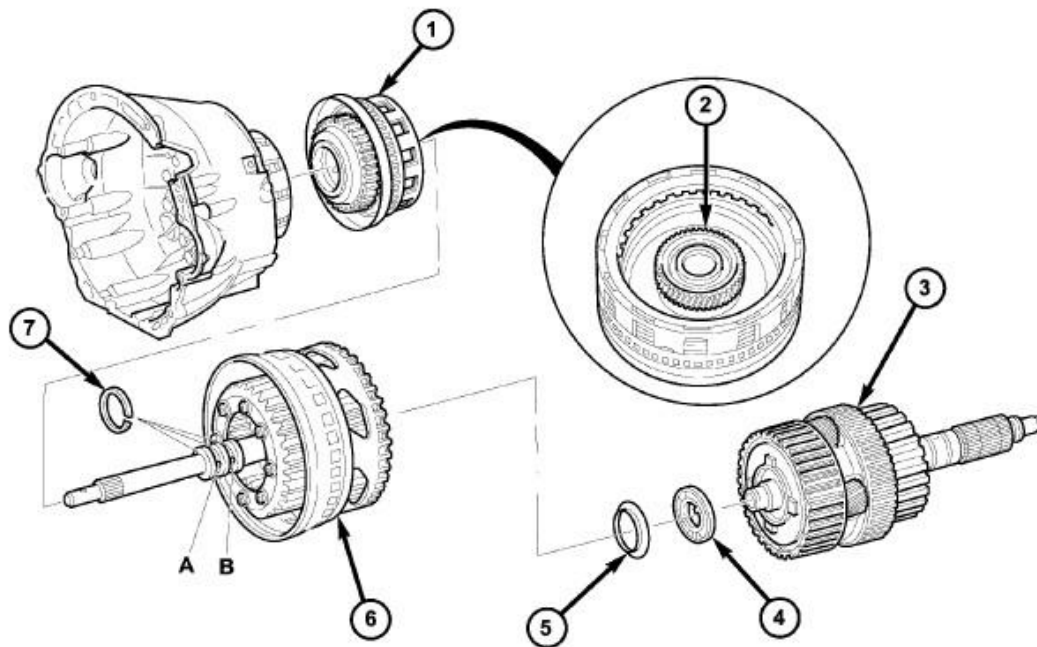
Remove/Install K1, K2, and K3 Clutches
